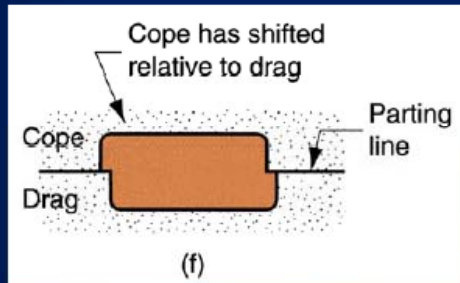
Common defects in sand castings: (f) mold shift
